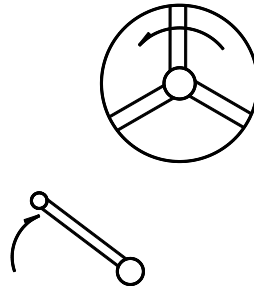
Operating handle for forward / reverse of spindle and rotating direction of spindle
